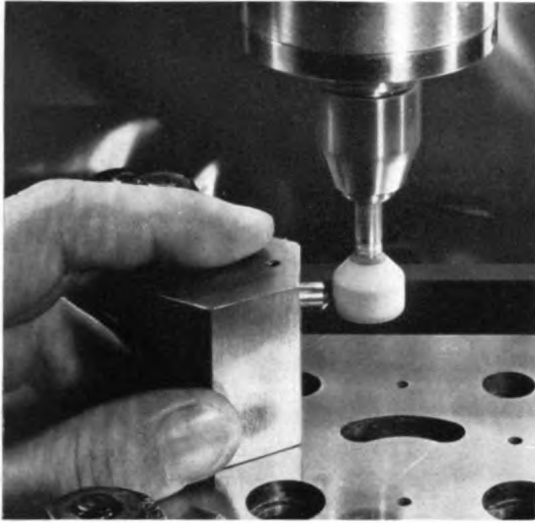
The hand-held, diamond wheel-dressing tool is convenient and effective.
